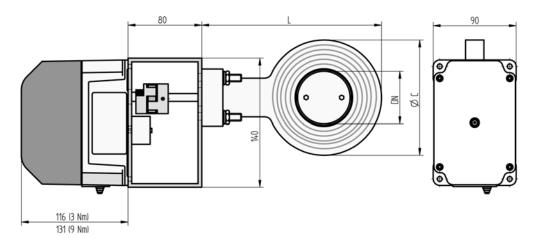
Gas damper with console and coupling mounted on actuator controlled by BT300
